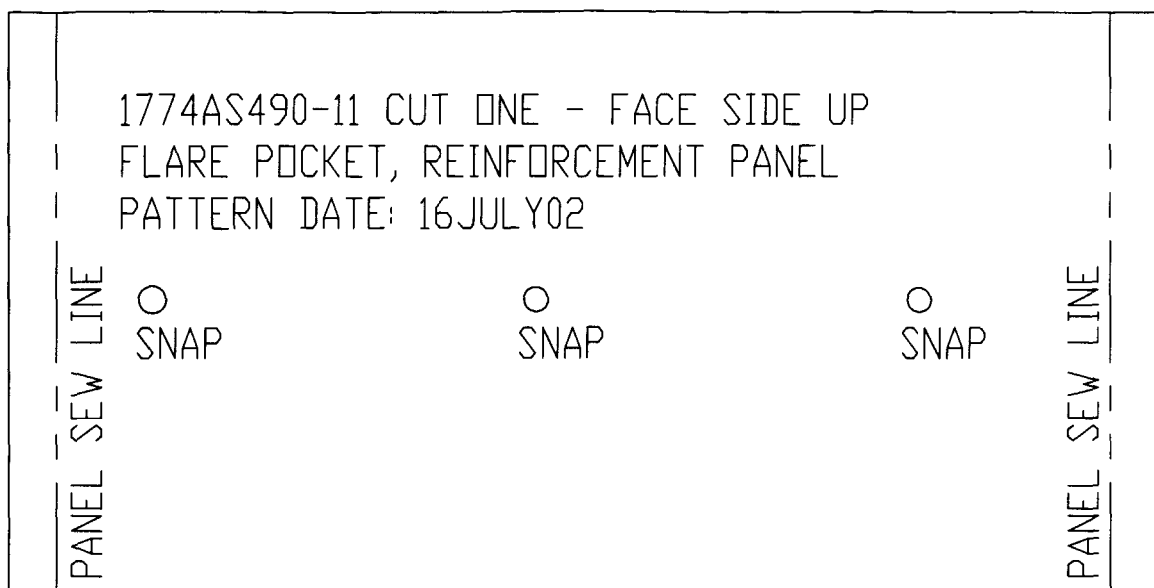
L. Flare Pocket Side Panel Back Pattern (Sheet 2 of 2)
